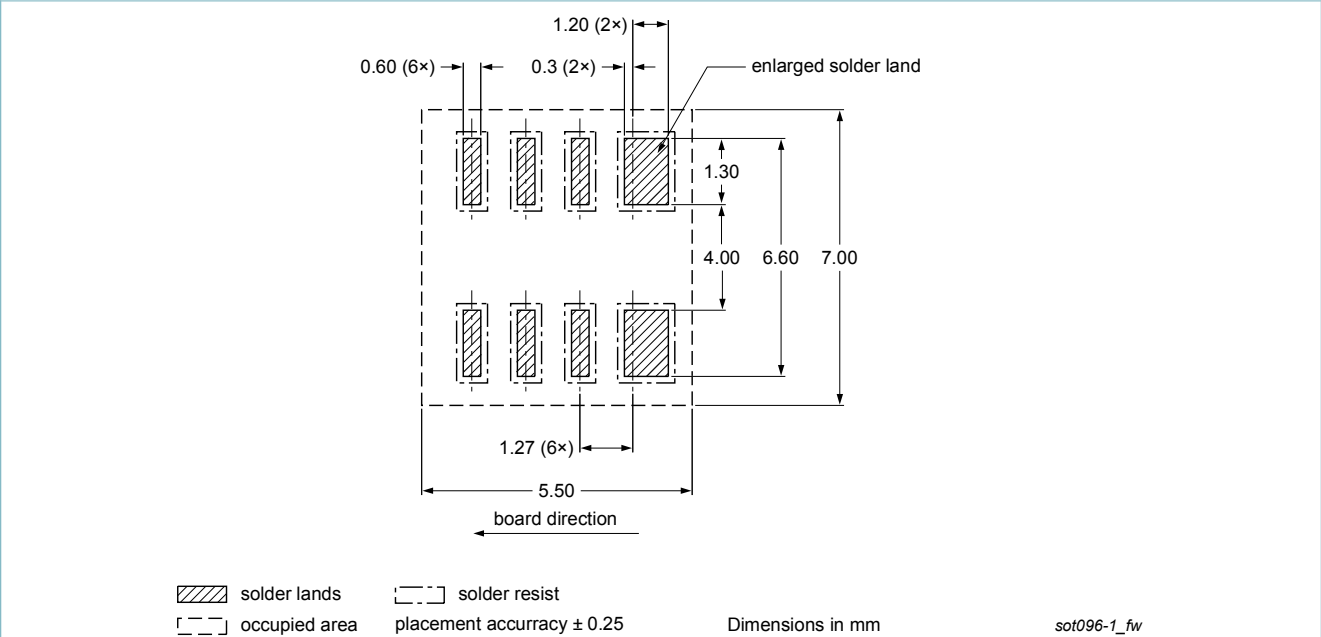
Wave soldering footprint for SO8 (SOT96-1)
